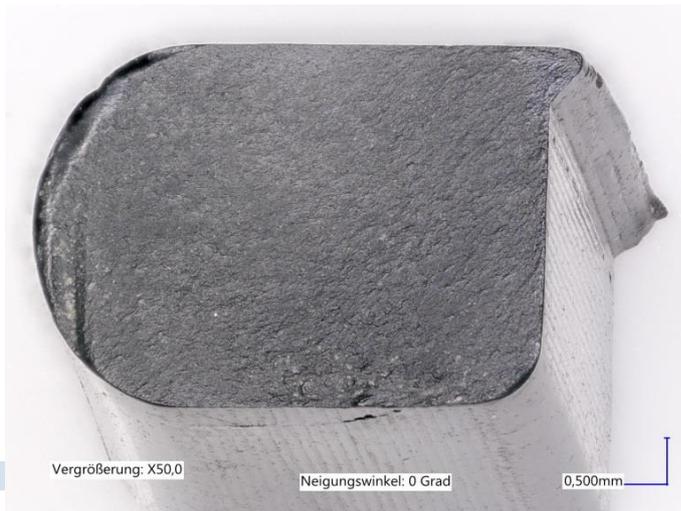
Cross-section of a damage O-ring: In addition to the permanent deformation, a typical impermissible thermal stress is a complete embrittlement, which is indicated here in the structure of the sectional surface.
